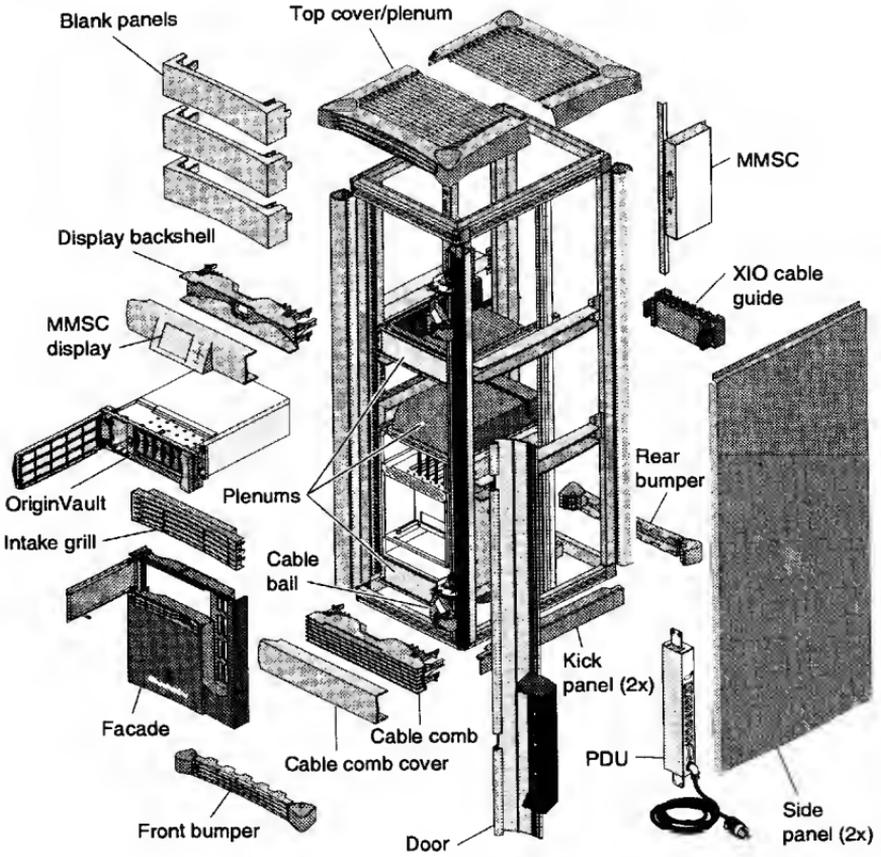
Origin 2000 Rack Exploded View (Part 2 of 2)
